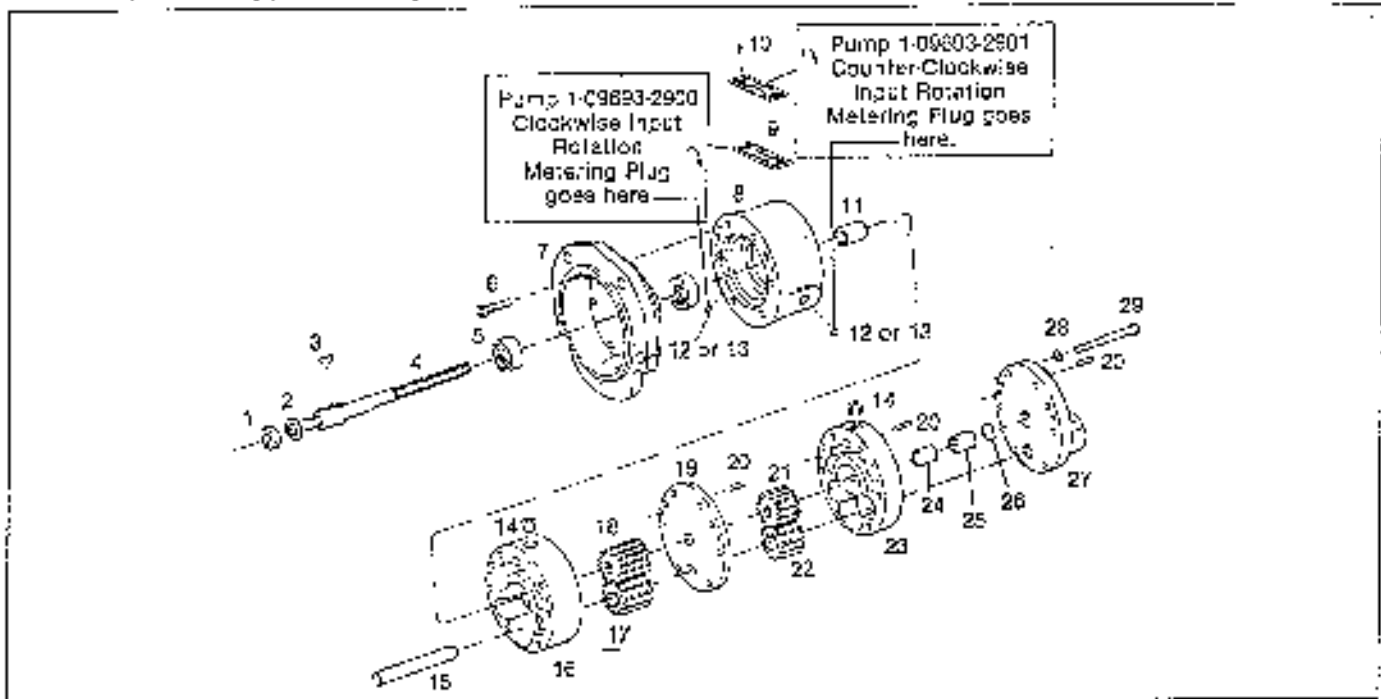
Duplex Pump Assembly, Direct Engine Mounted
